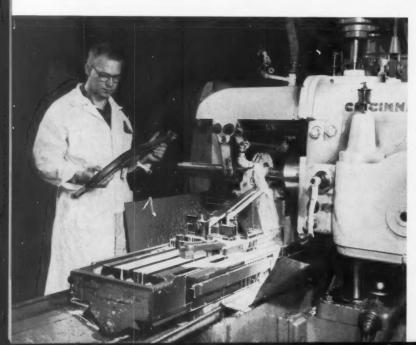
Straddle-milling the center web of a dog-leg shaped airframe member. A template is mounted on the work-table to guide cutters in following the work-piece contour.
